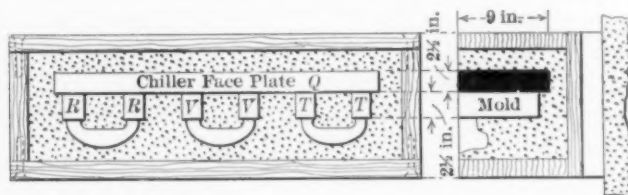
OPEN SAND MOLD FOR MAKING COMPARATIVE CHILLING TESTS
